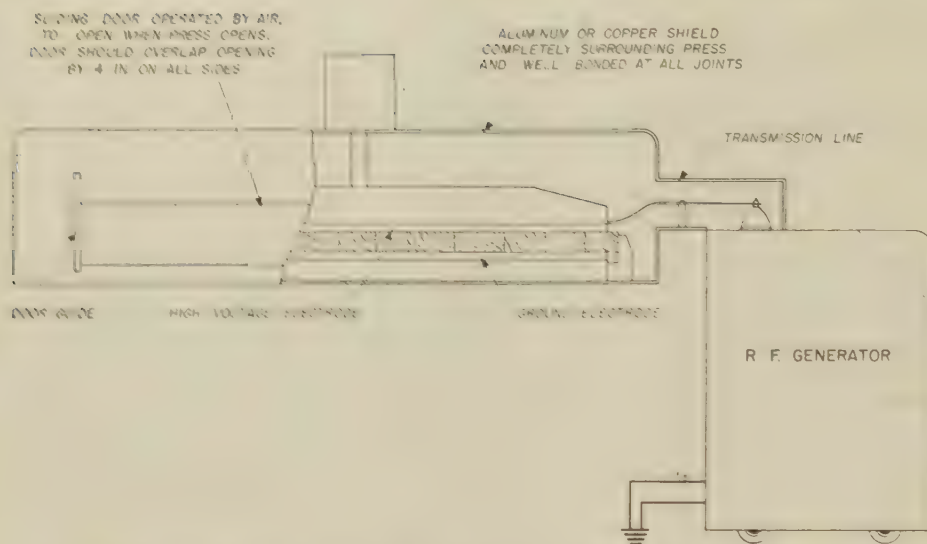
DIAGRAMMATIC DRAWING OF EDGE-GLUING PRESS AND RADIO-FREQUENCY GENERATOR ASSEMBLY
